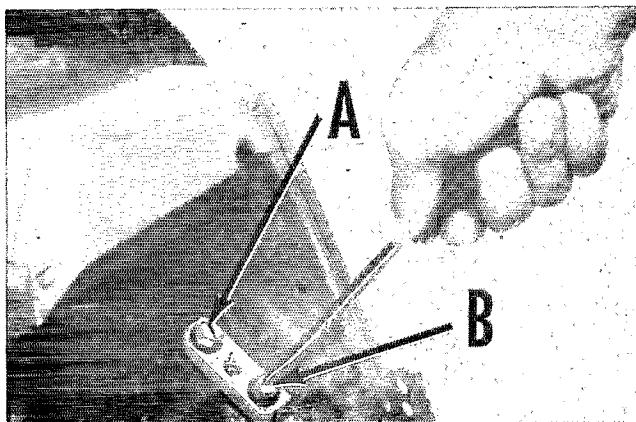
Adjusting the bed knife is the most important adjustment on your Sportlawn implement. To set the bed knife up against the reel blades, loosen rear adjusting screw "B" (using a screw driver as shown) very slightly about 1/20th of a turn, then tighten front screw "A" in the same manner. Do this at each end of bed knife. Then slowly revolve reel to see if it is adjusted properly. Repeat or reverse above operation until bed knife bears lightly and smoothly against each blade and can cut paper for its full length.
